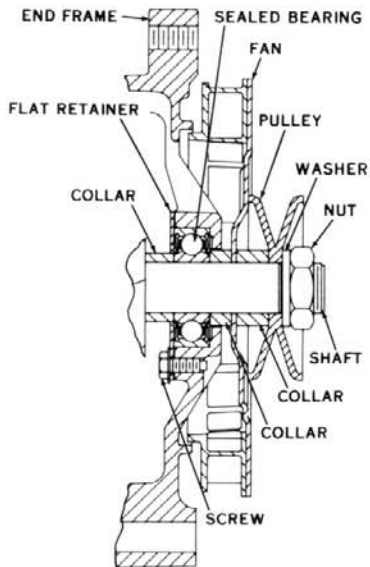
Drive end bearing assembly, late production, 10-SI and 15-SI/116.
